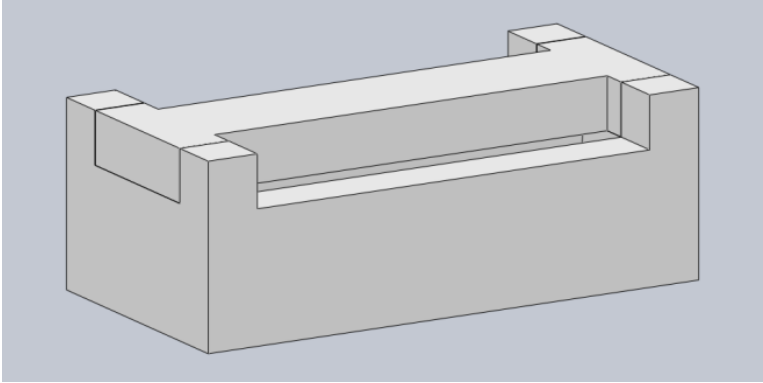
The assembly of the top mold and the top mold insert used to create the top component of the straight and bounded actuators.
